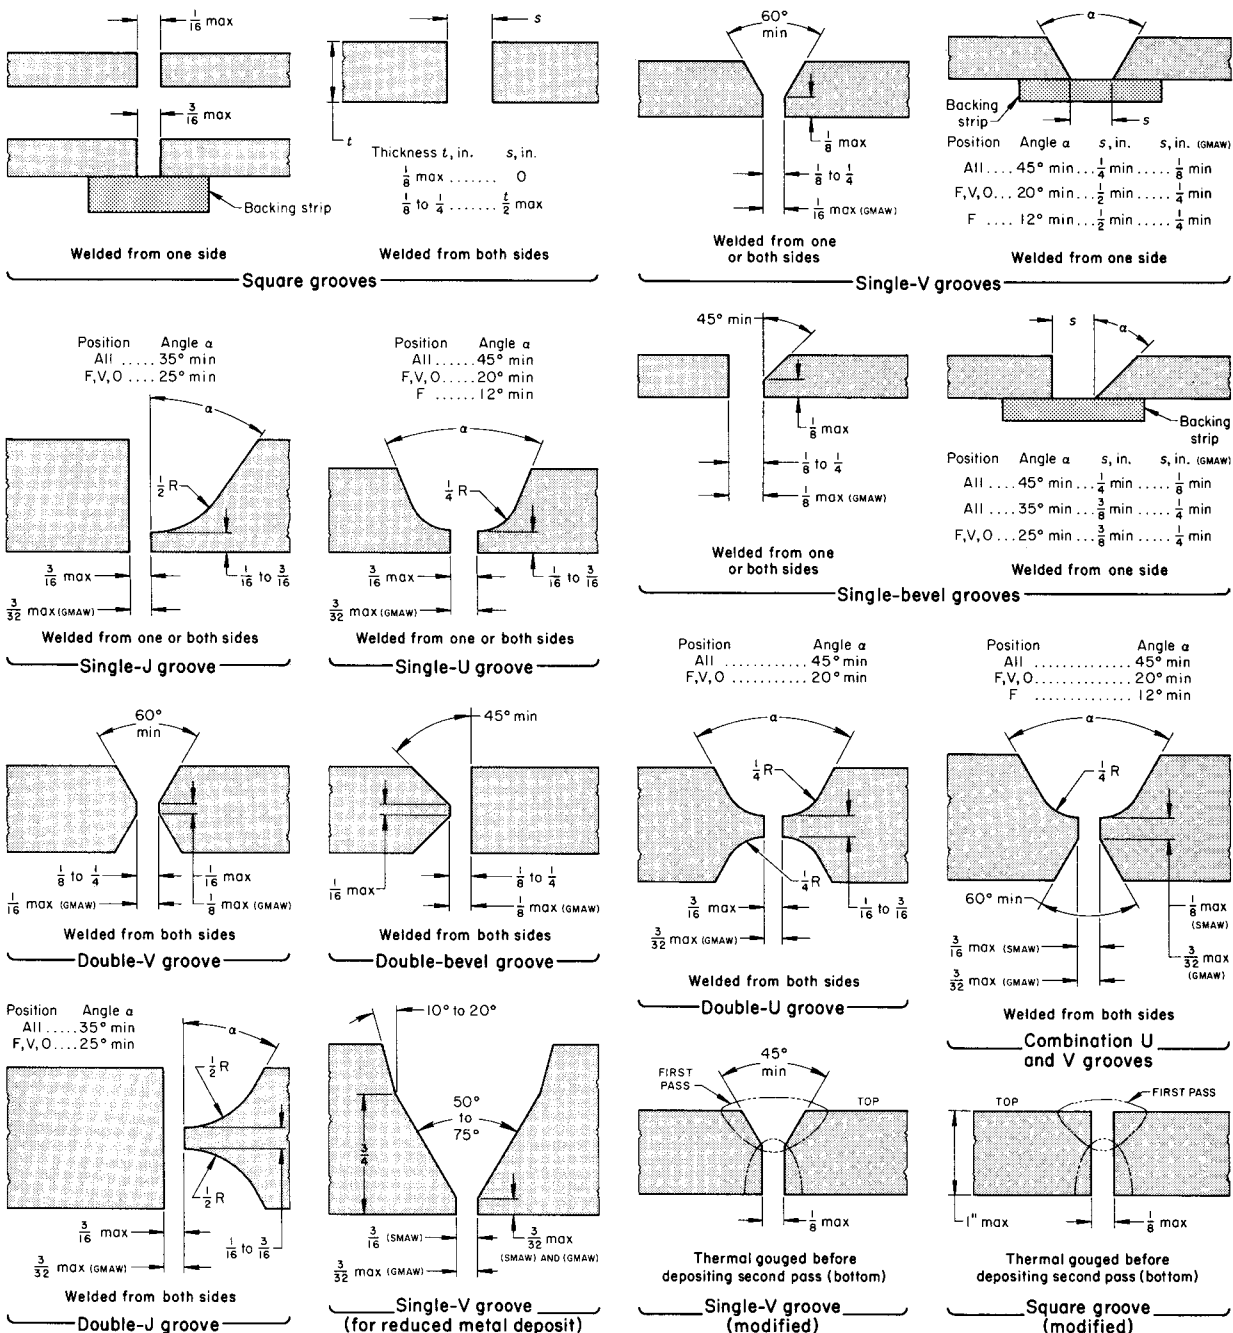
Recommended proportions of grooves for butt joints. Made by shielded metal arc welding, gas metal arc welding, gas tungsten arc welding, flux cored arc welding, and oxyfuel gas welding (except pressure gas welding). Dimensions that apply to gas metal arc welding only are noted.
